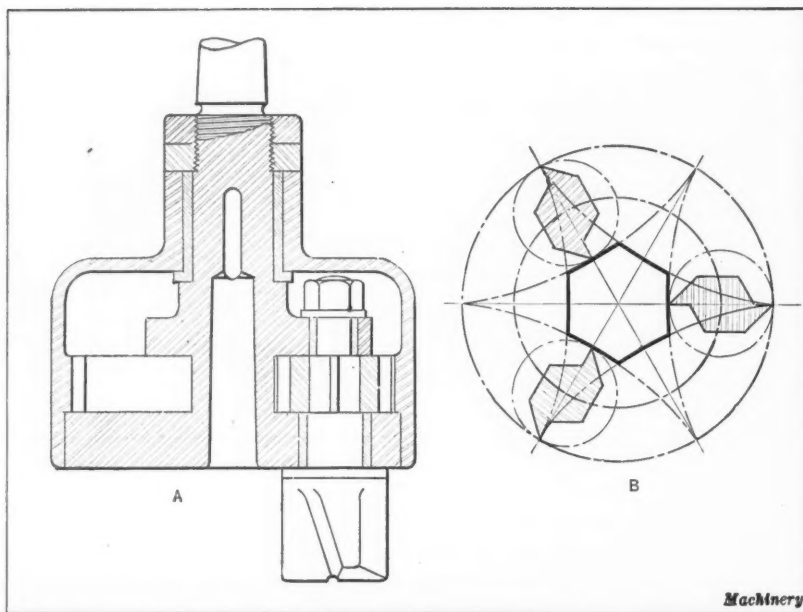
Sectional View of the Hexagon Milling Tool and Lay-out of the Cutters
